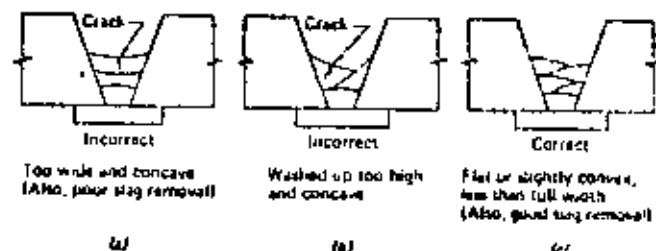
Wide, concave passes (a and b) in a multiple pass weld may crack. Slightly convex beads (c) are recommended.
